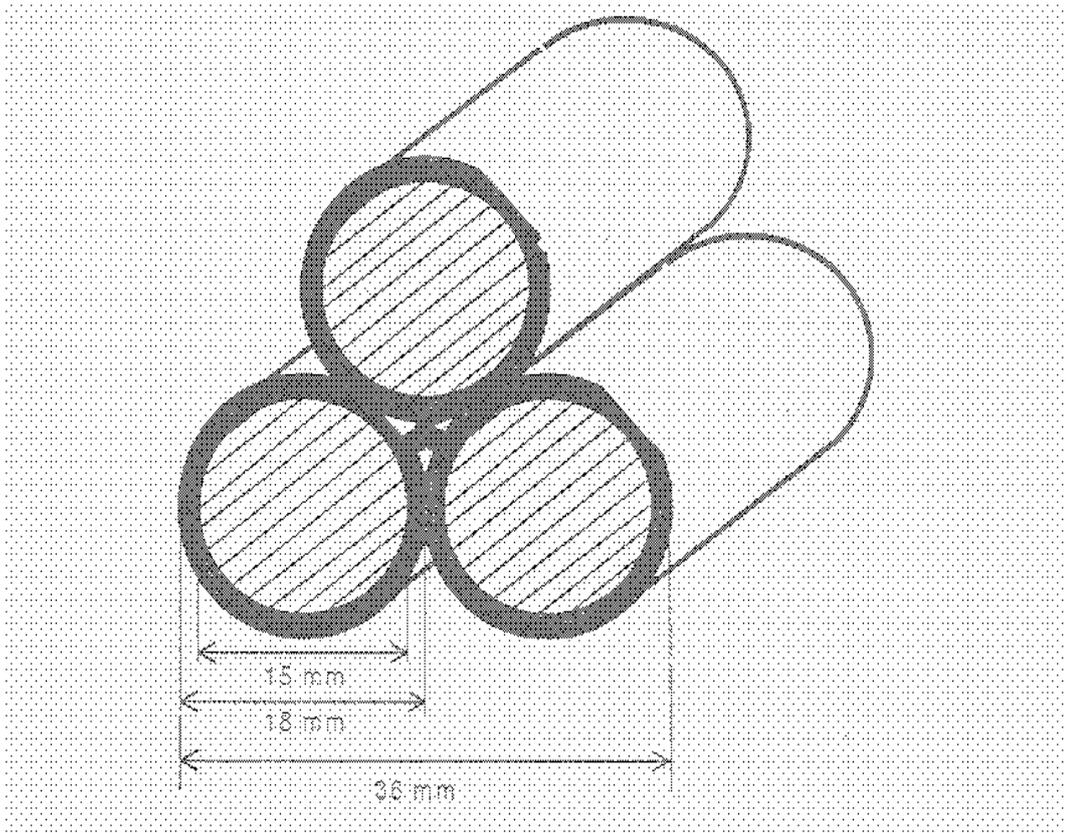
18mm 3-CHANNEL CONDUIT
